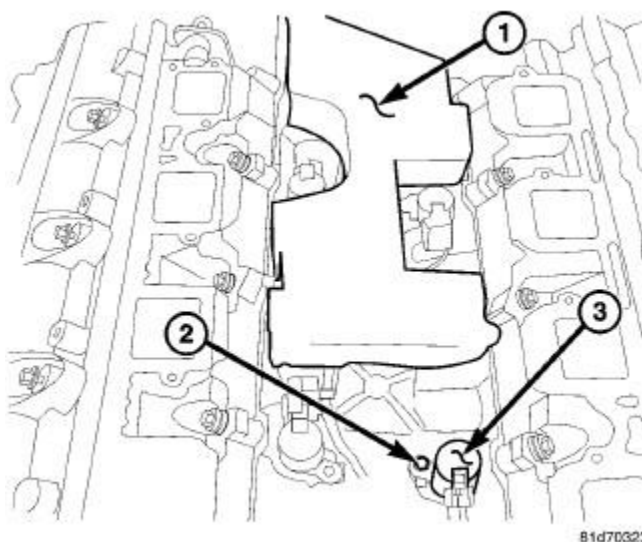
Intake Manifold Foam Insulator Pad, MDS Solenoids & Bolts
